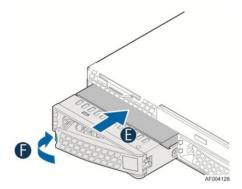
Installing Hard Disk Drive – Inserting 3.5" HDD assembly
